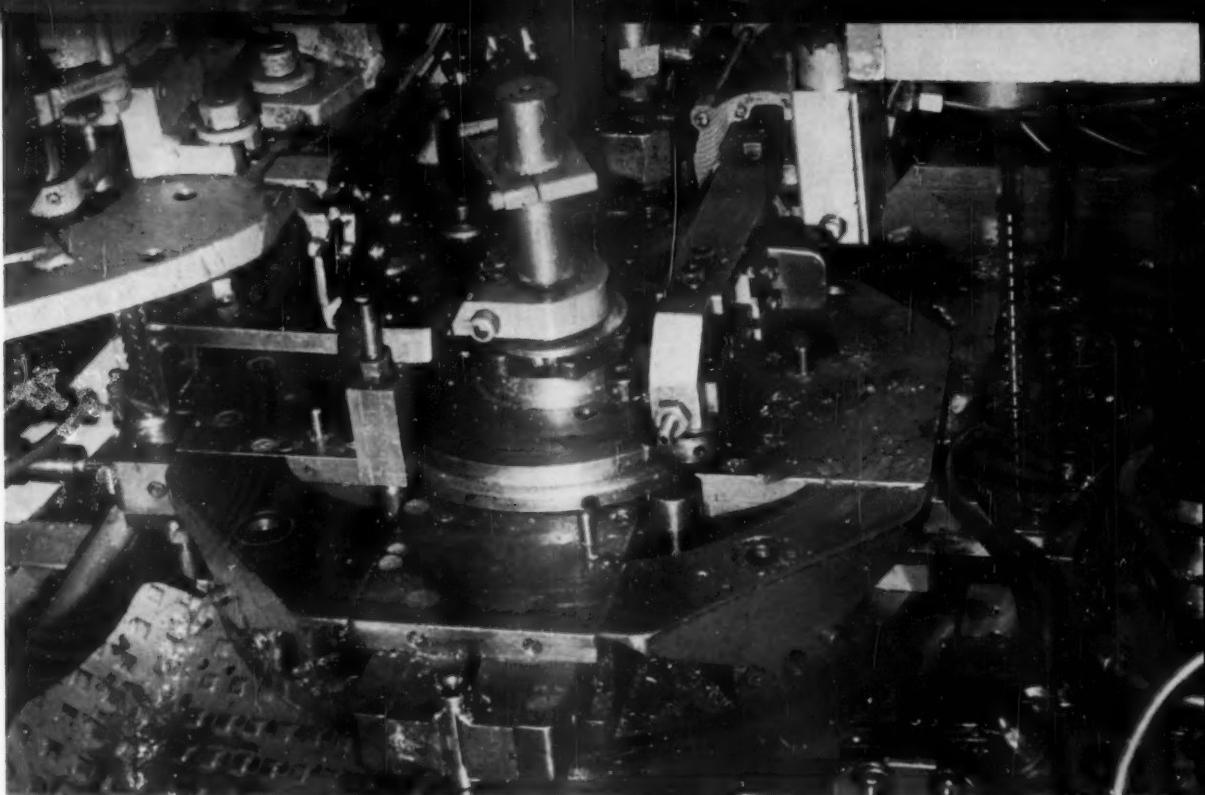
Special four-station machine broaches, cross drills and taps parts to close tolerances.
